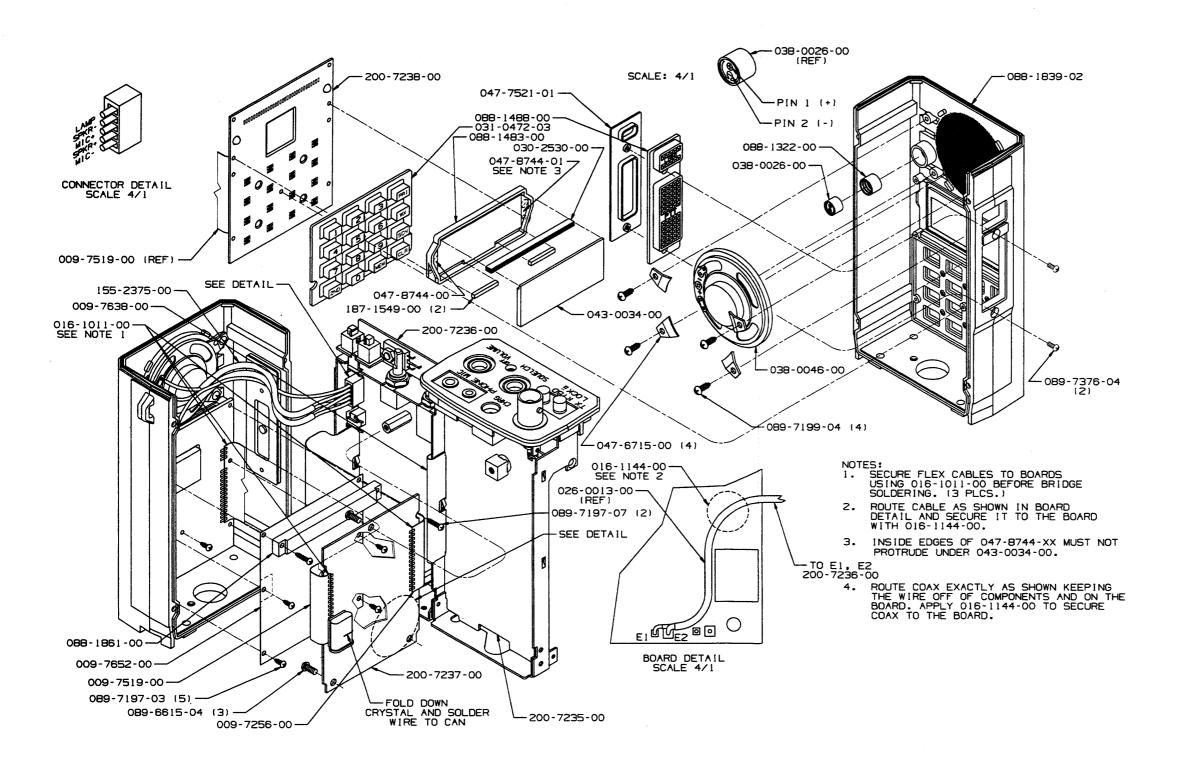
KX 99 FINAL ASSEMBLY (Dwg No 300-3635-00 R-3) (Sheet 1 of 2)
